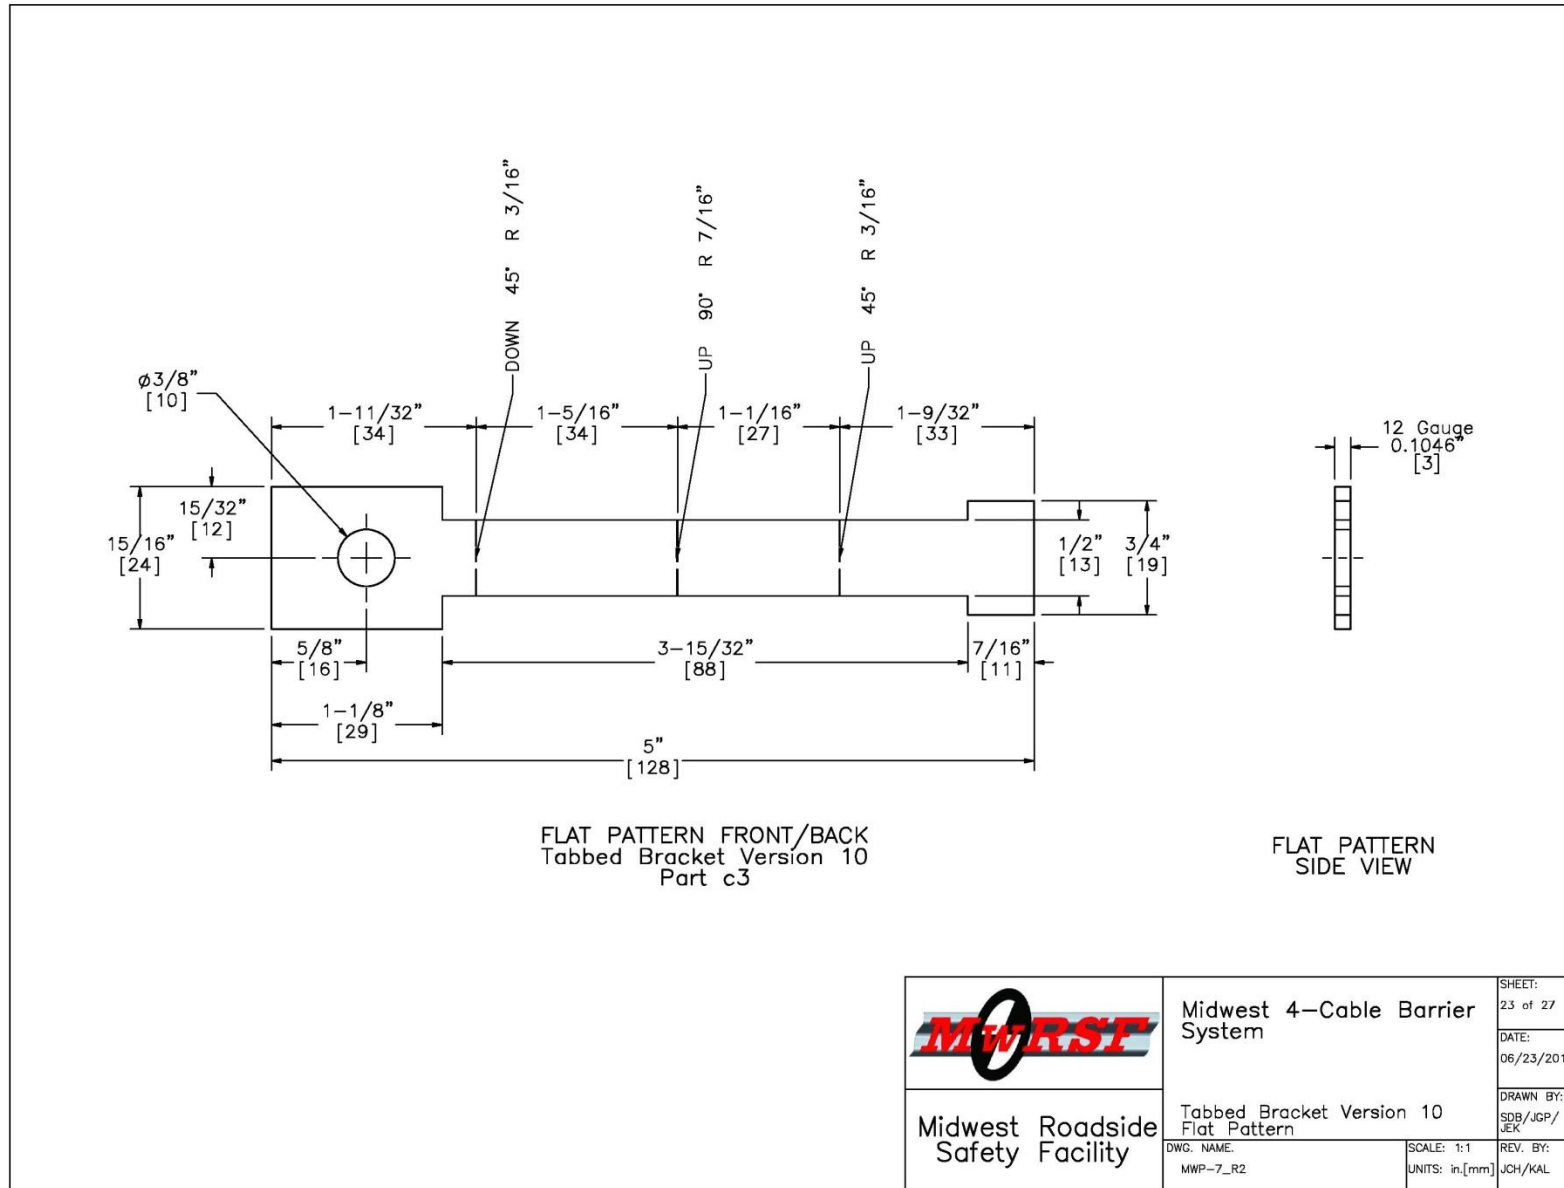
Tabbed Bracket Details, Flat Pattern, Test No. MWP-7
